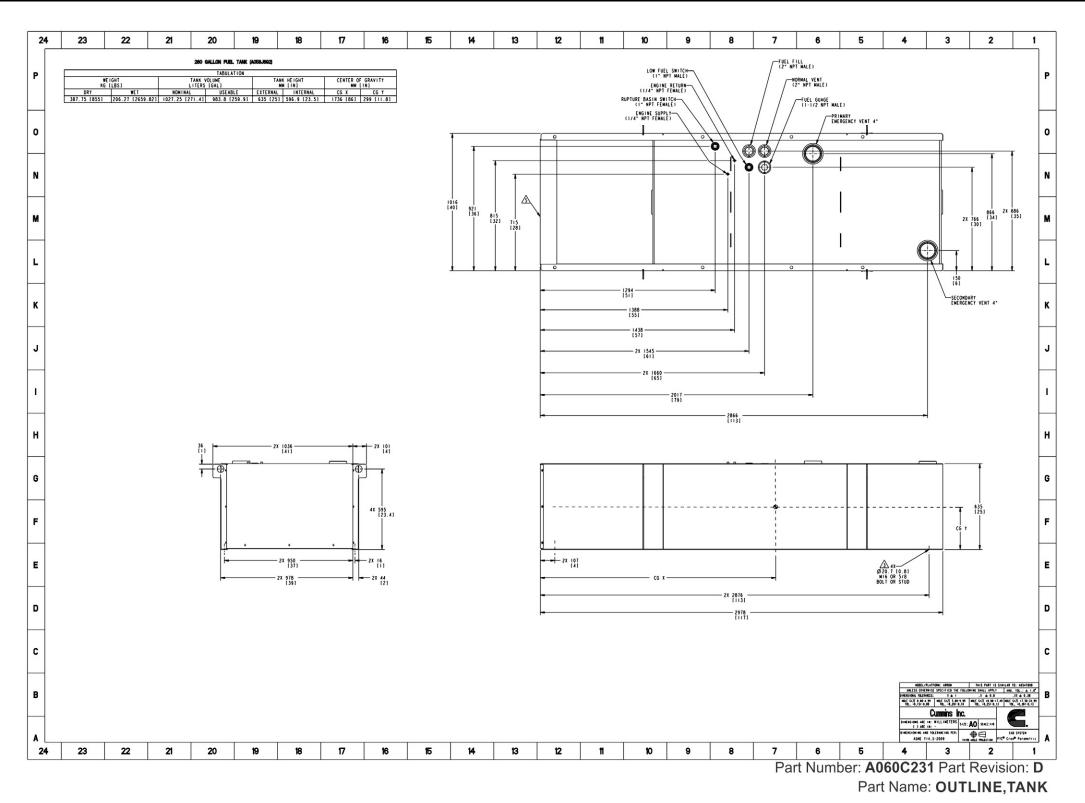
TANK OUTLINE DRAWING (SHEET 2 OF 5)
